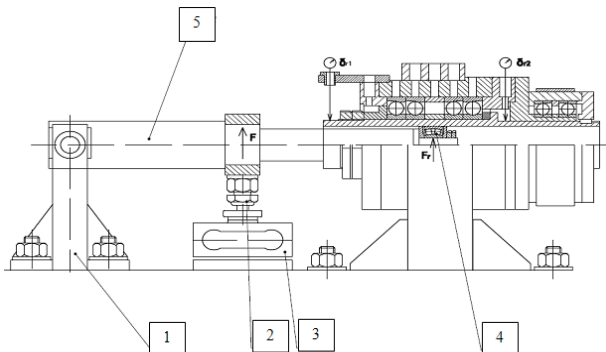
Cut of experimental stand, 1- holder, 2- to retighten screw, 3- dynamometer, 4- force bearing, 5- force arm
